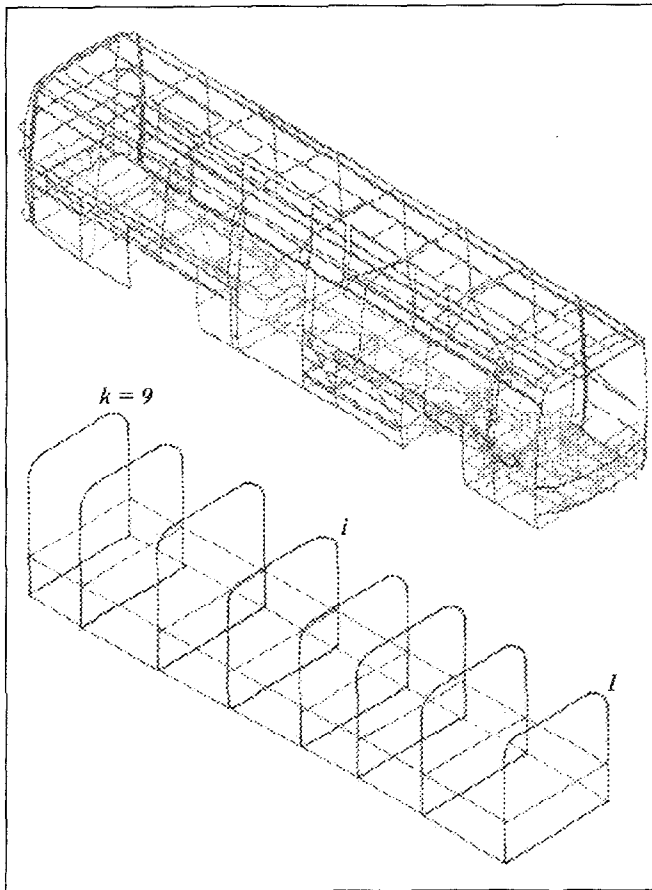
Each bus or coach can be modeled with plane cross-sectional segments.
